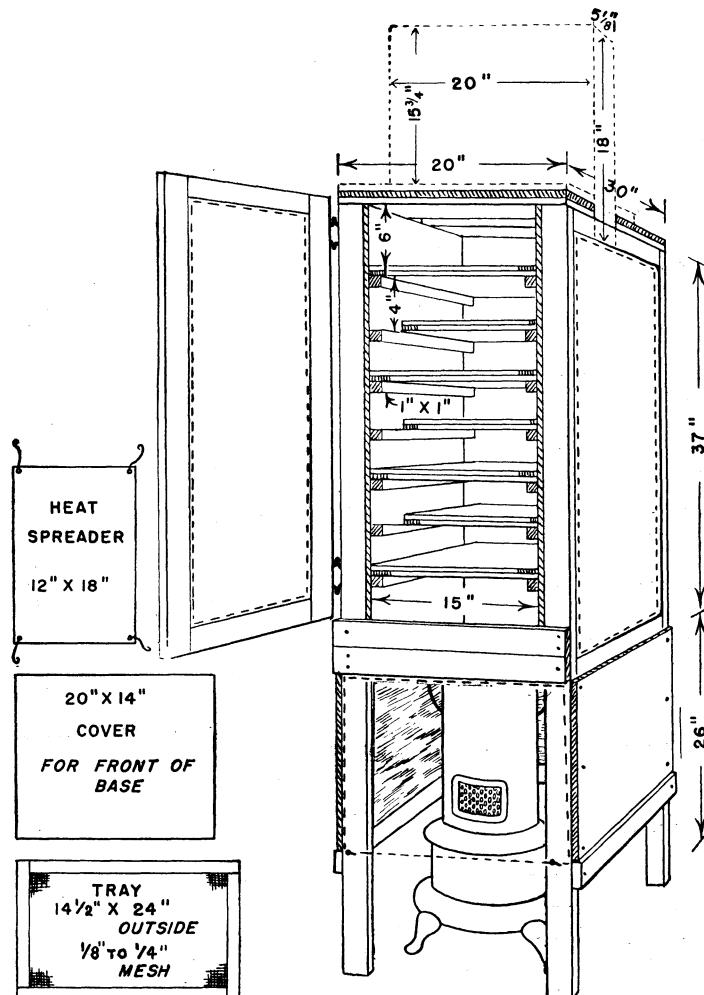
Cabinet drier. (Adapted from The Home Evaporator, College of Agriculture, University of California, Berkeley.)
